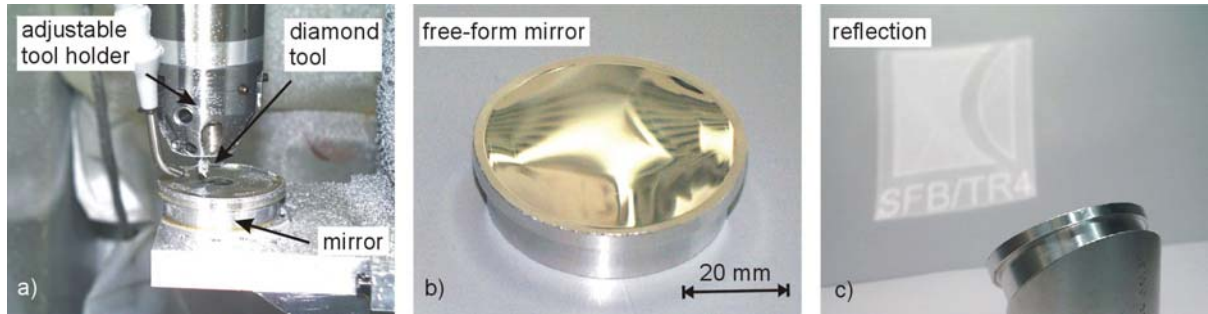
Experimental setup for ball-end milling on a Precitech Freeform 3000 (a), machined free-form mirror (b) and projection of the SFB/TR4 logo (c).
